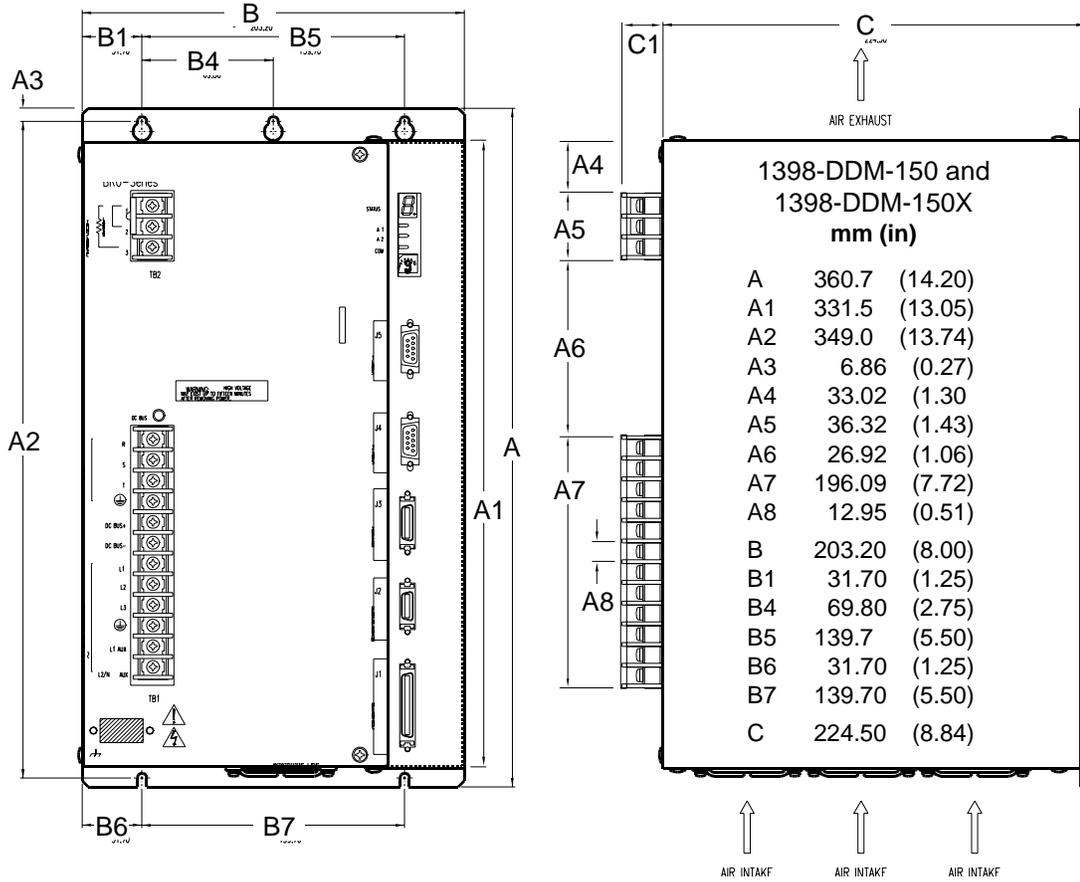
1398-DDM Mounting Dimensions (sheet 2 of 2)
